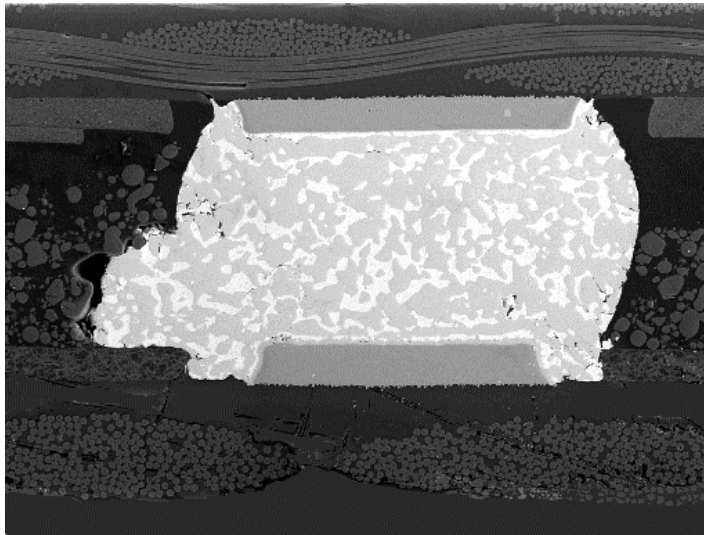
Failure Mode for Underfilled (UF1) BGA Solder Extrusion with Filler Separation in the Underfill
